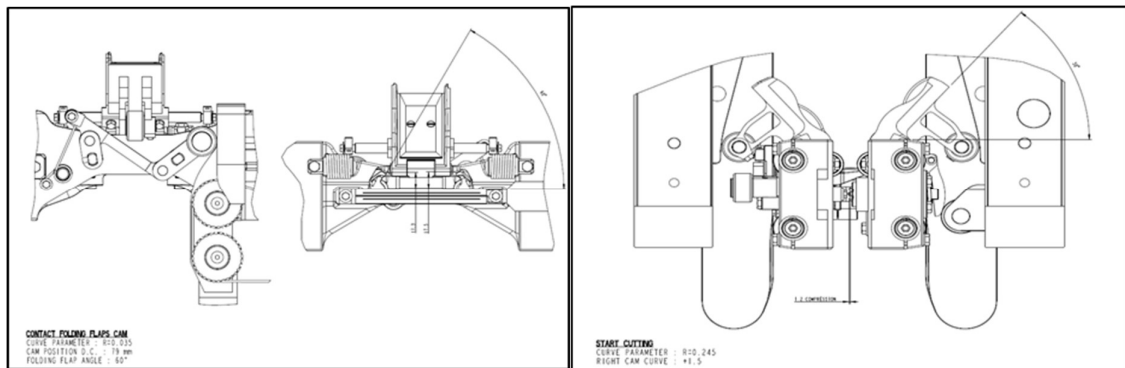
Contact Folding Flap and Cam (left), Cutting Phase (right)
